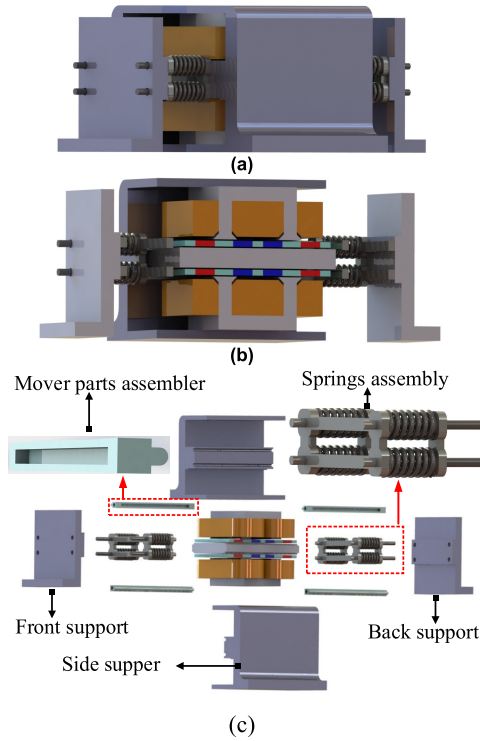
Complete setup of the investigated actuator (a) full compact view (b) section view (c) unpacked exploded view.
